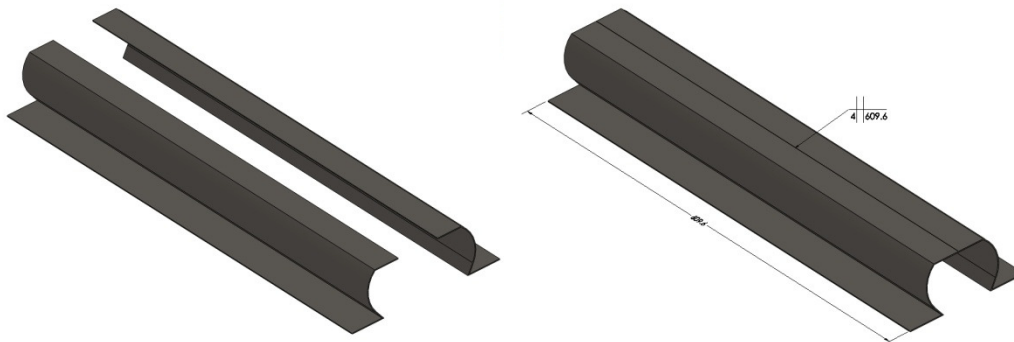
The SEA for testing was fabricated from two pieces of sheet metal. Two side were bent on a sheet metal brake and TIG welded together.
